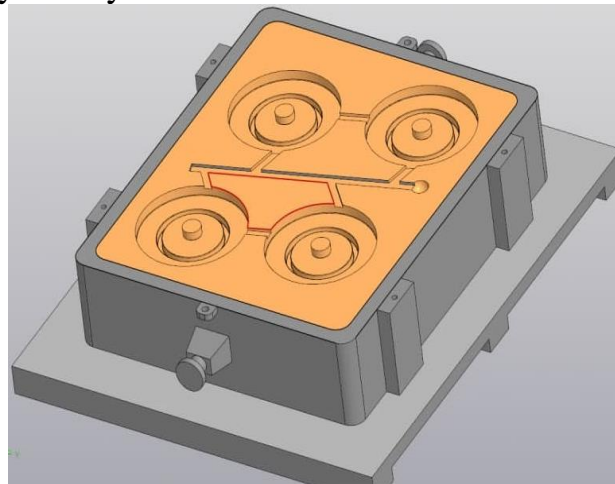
Sand – clay mold prepared for casting from a liquid alloy
